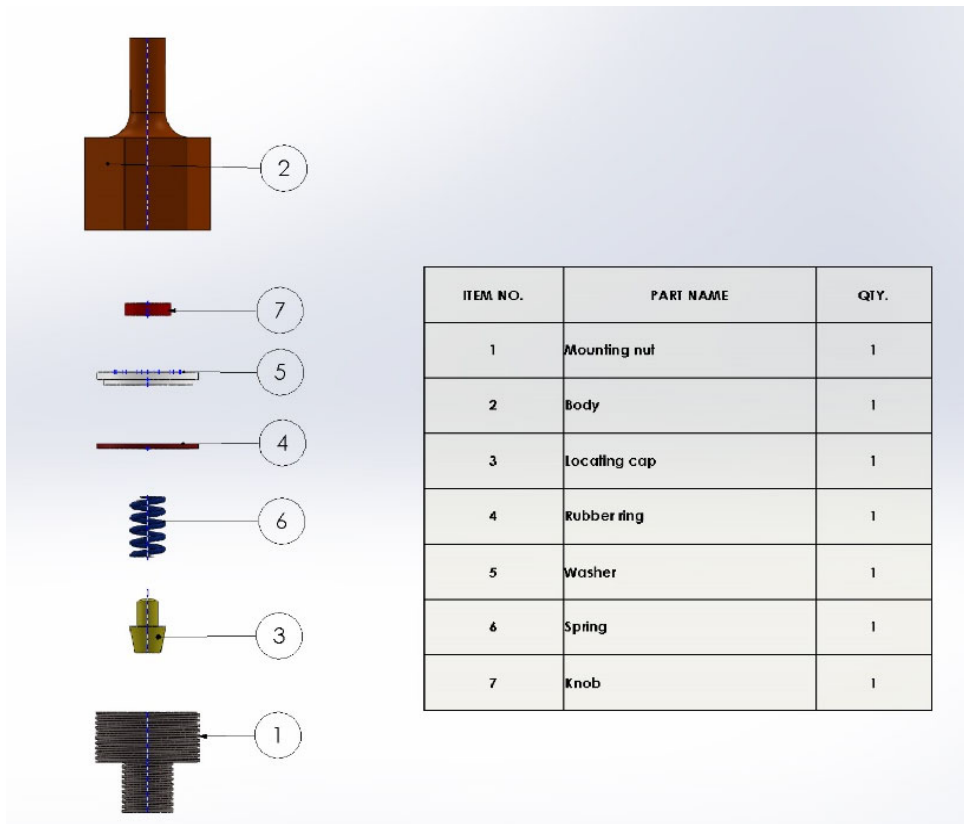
Exploded view of redesigned overflow valve (see online version for colours)
